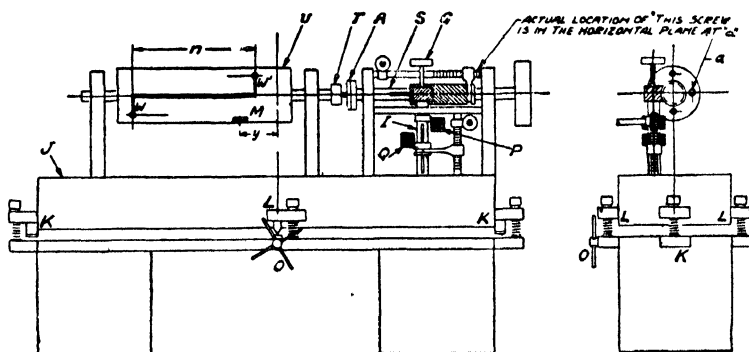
THE OLSEN-CARWEN TYPE C BALANCING MACHINE
